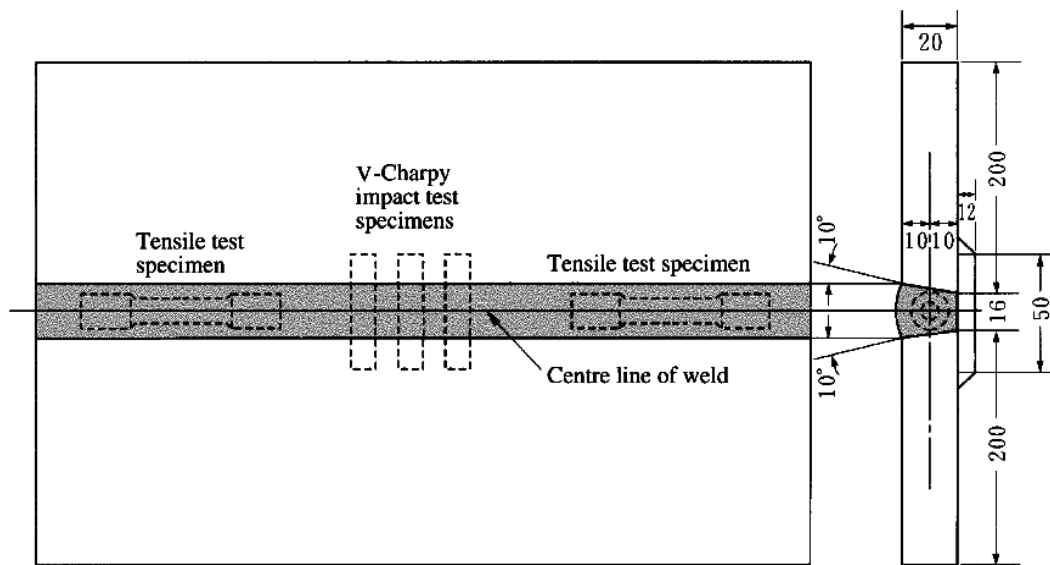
Butt Weld Test Assembly with Multi-run Technique (Unit: mm)
